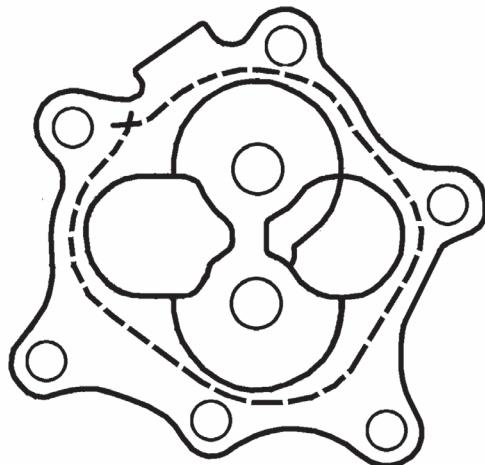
Scavenge Pump Housing Silk Thread Pattern
